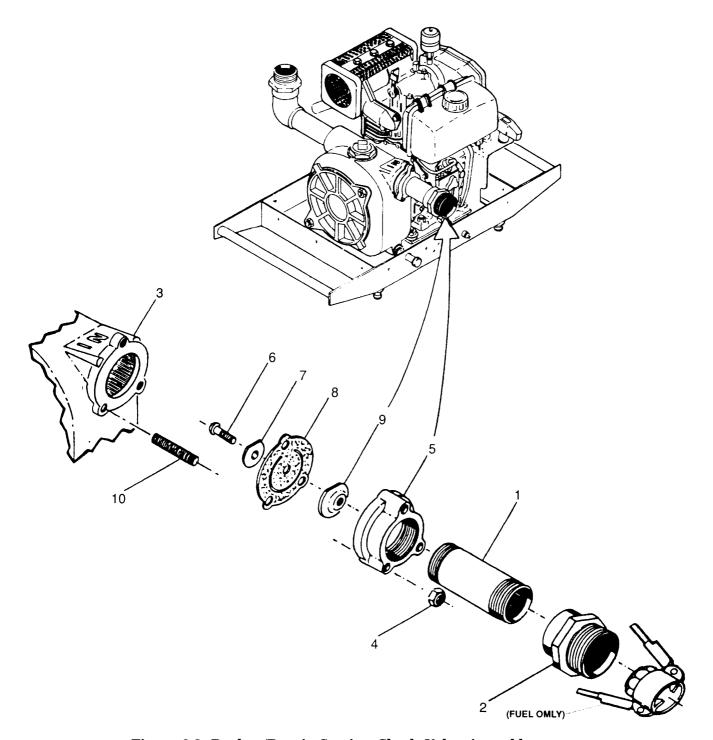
Replace/Repair Suction Check Valve Assembly
